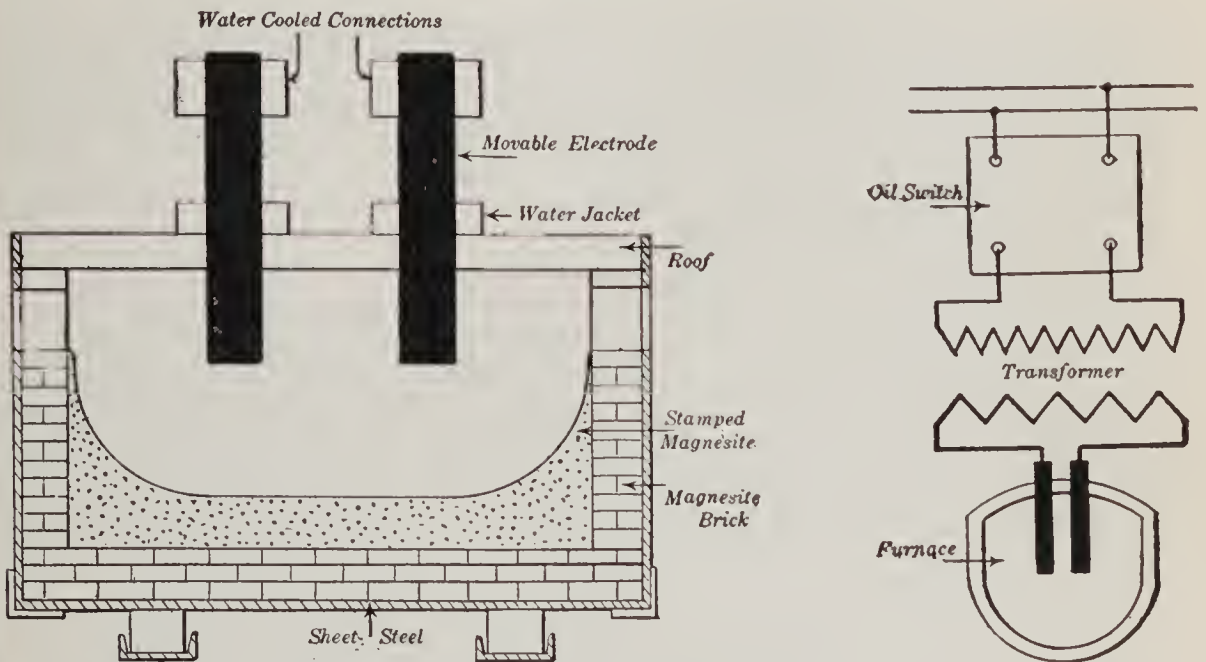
Cross section of Heroult furnace and plan of connections.
